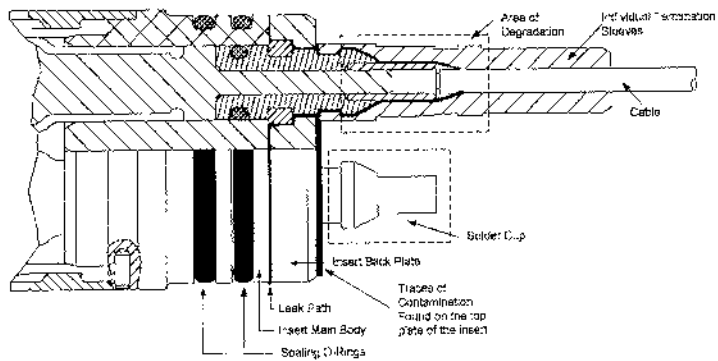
Insert Assembly Section Drawing - No housing shown
